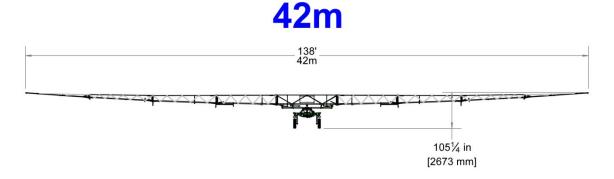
Overall Dimensions 4 Wheel Irrigation Booms
